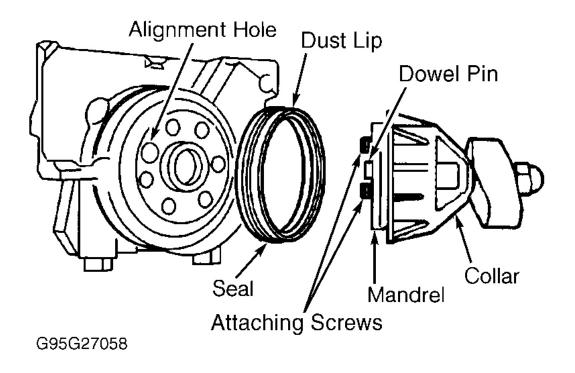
Installing Rear Crankshaft Seal Courtesy of GENERAL MOTORS CORP.
